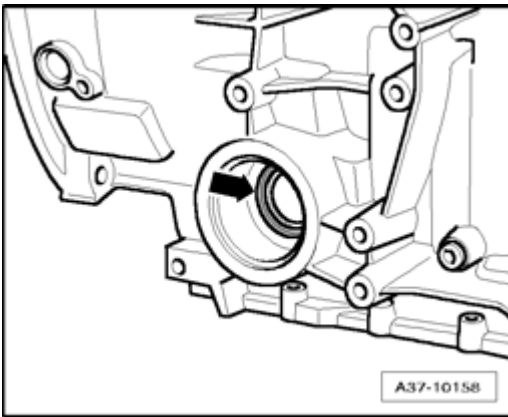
Locating Securing Ring For Protective Tube On Left Transmission Side
